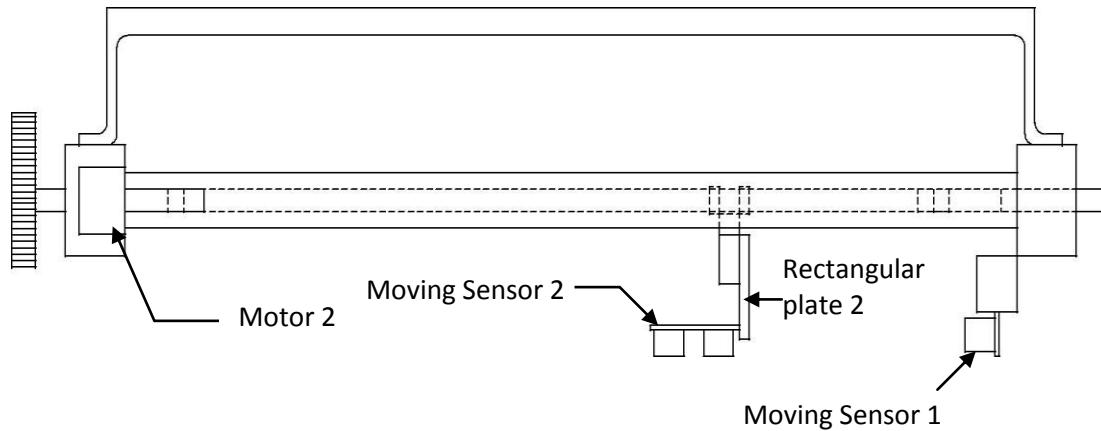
Front View of Transverse Component (all dimensions are in mm)
